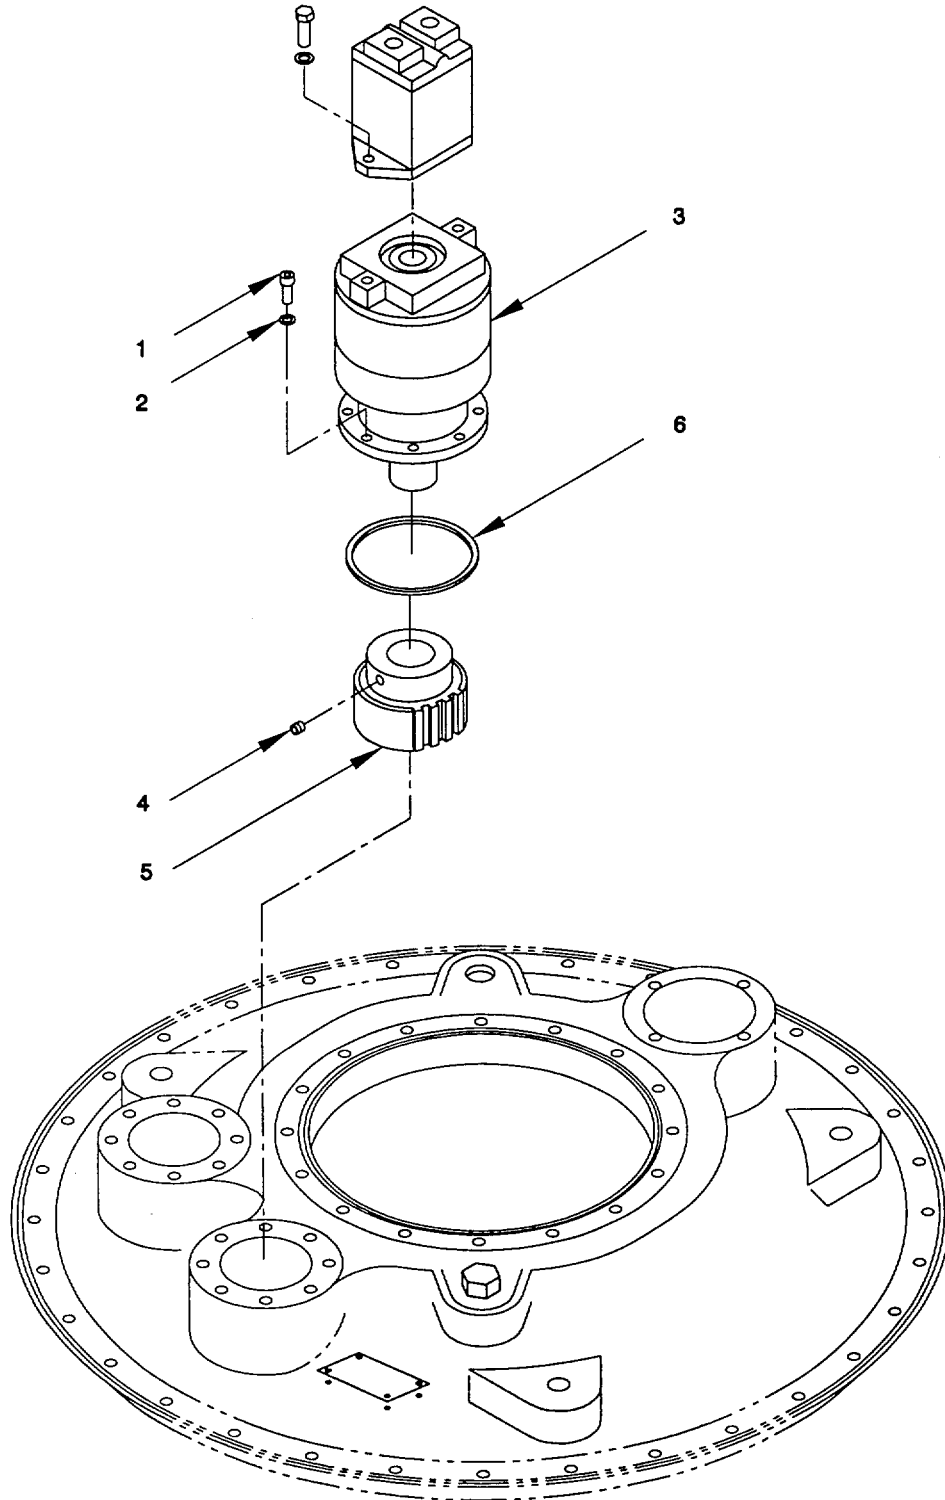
Planetary Gearing, Steering Motor, Pump-Jet, Remove/Install.
